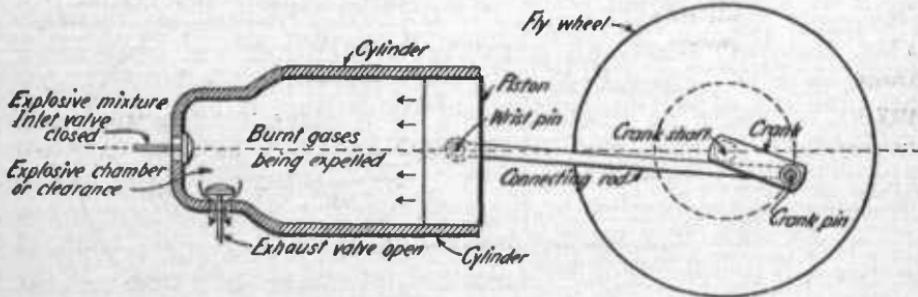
Diagram showing mechanism of internal combustion engine—exhaust stroke.
